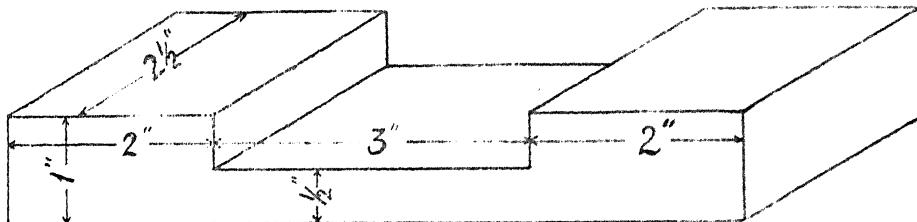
SINGLE SHEAR TEST SPECIMEN.
